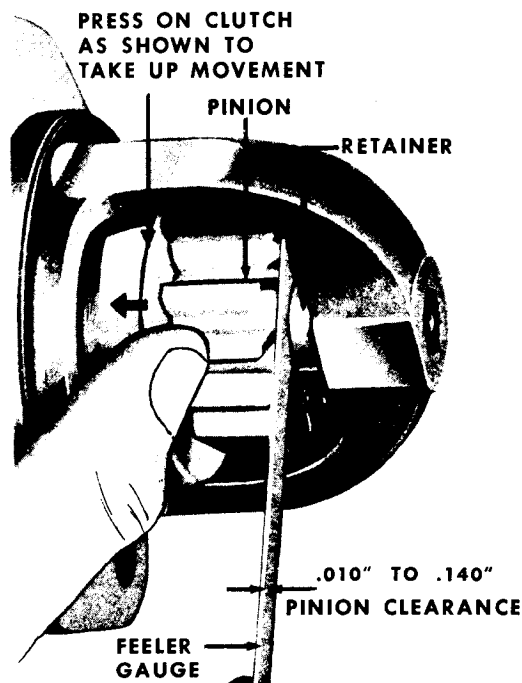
Checking pinion clearance on intermediate duty clutch motor.
